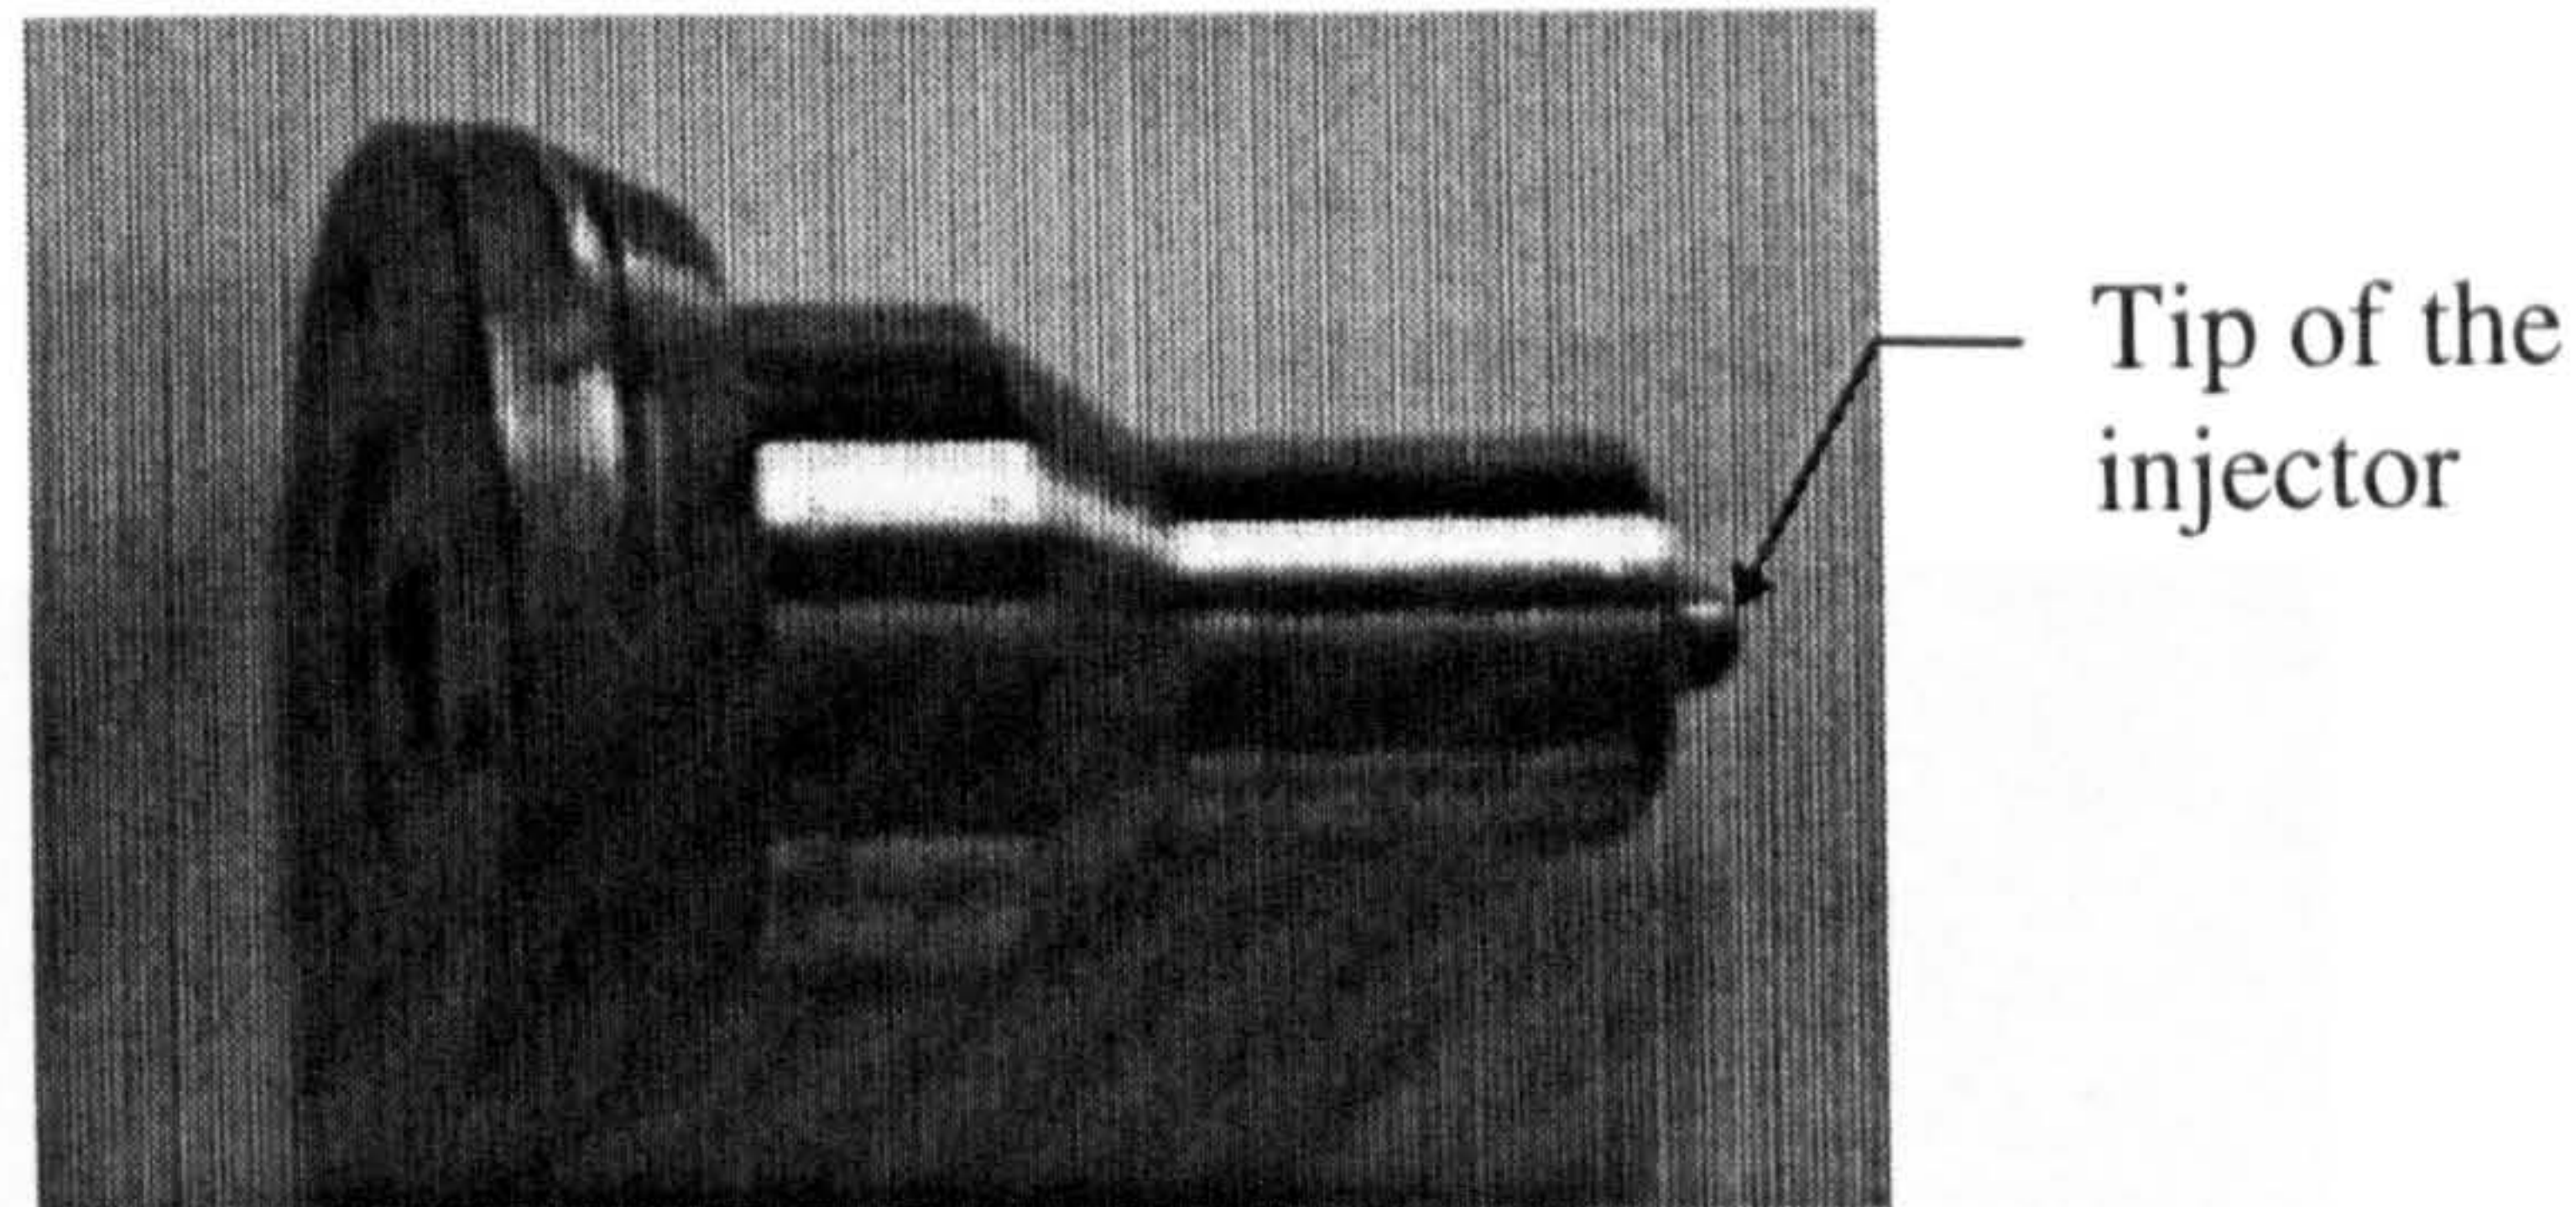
A diesel engine injector. There are 8 holes on the tip. Detail of the tip is given in figure 1-6 and figure 2-9 (a)
